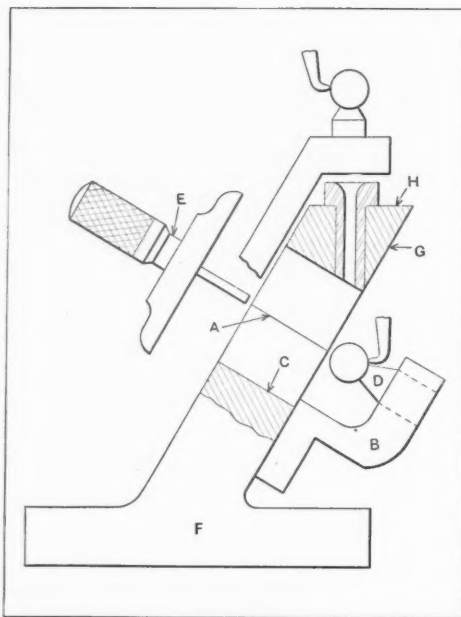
Jig for drilling Angular Hole in Stem of Fuse Body
